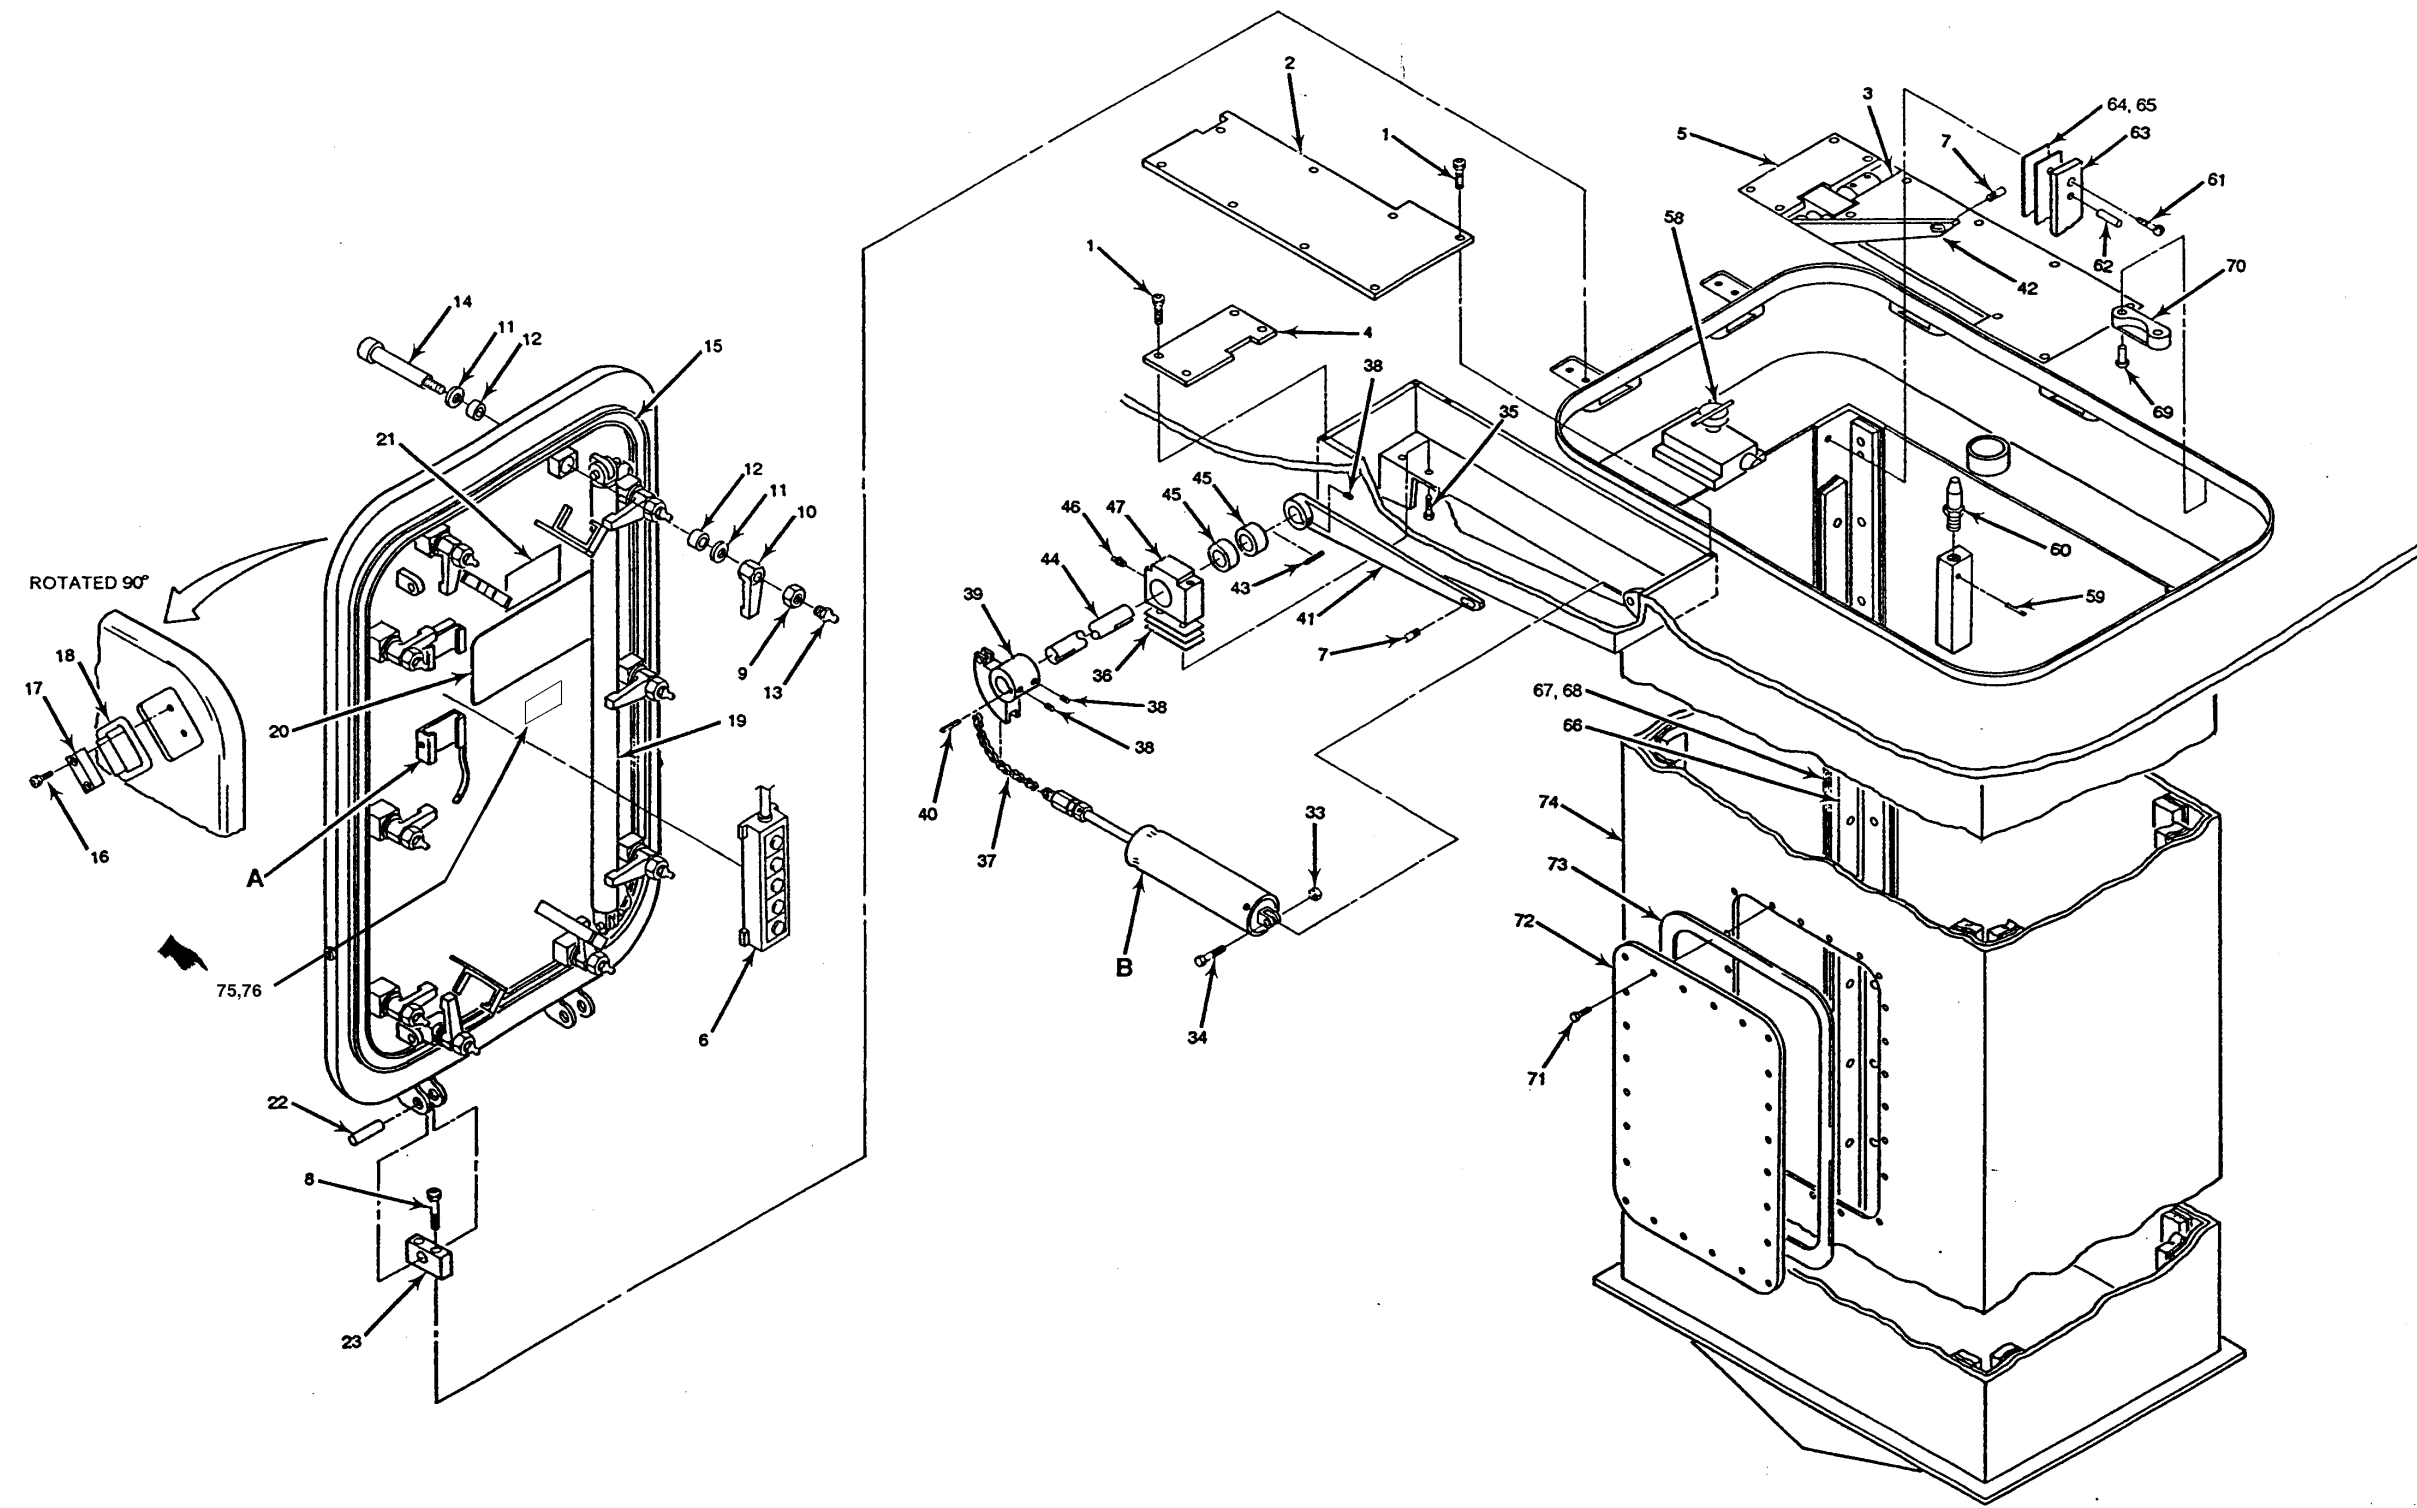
Trunk Assembly, Model CR-12B and CR-12B-P (Sheet 1 of 2)
